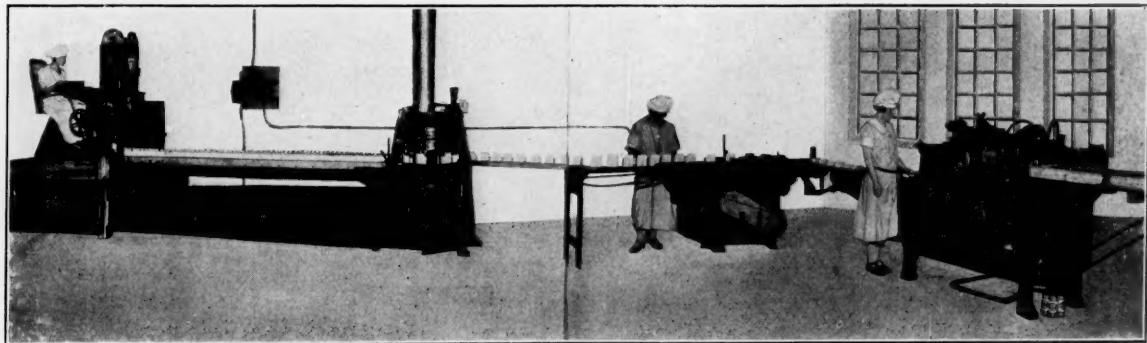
Forming and lining machine, filling machine, duplex closing machine, and wrapping machine for cheese package
